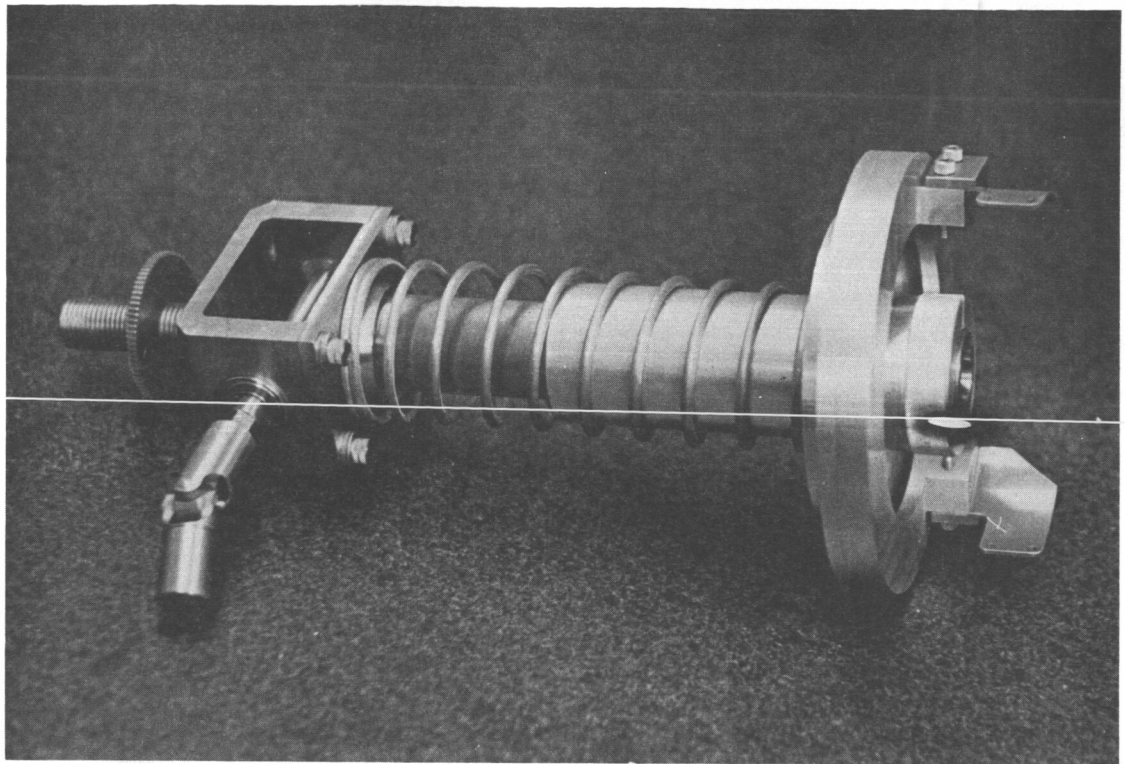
Focussing and drive unit showing universal joint for external drive, miter gear housing, focussing screw and gear, focussing spring, indexing plate, and bearing holders
